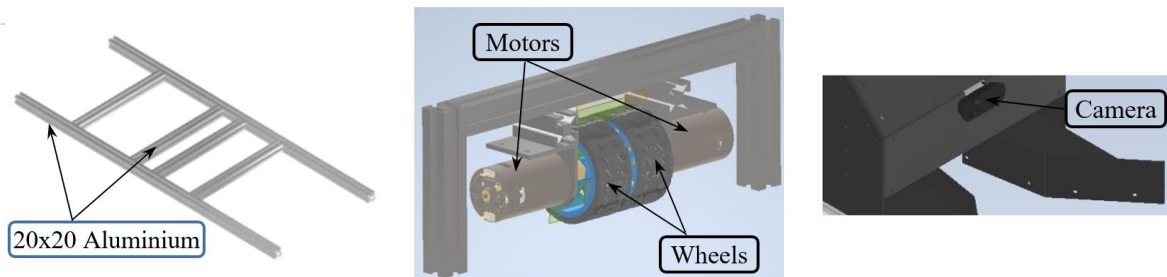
Robot chassis with 20x20 Aluminium Extrusion.
